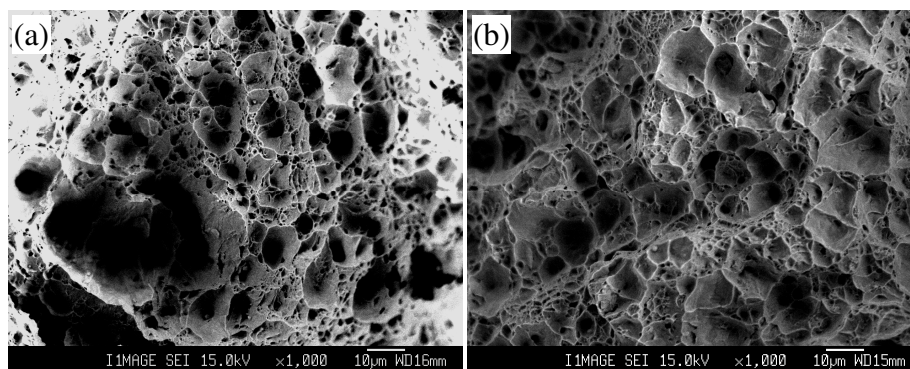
Fracture morphologies of specimens (a) LC and (b) TC after tensile tests.
